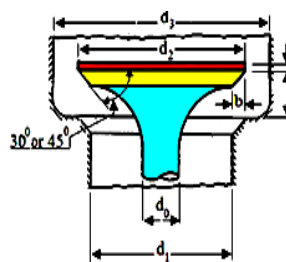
50 Geometry of Poppet or Mushroom Valve [37]
